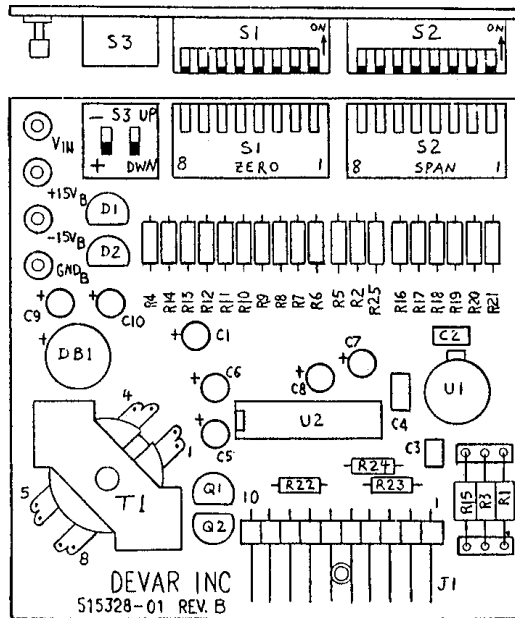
Thermocouple, mV, mA INPUT CARD ASSEMBLY
